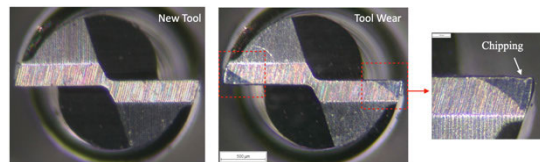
Flank wear of end milling with constant feedrate (1000 mm/min) when the current rises to 0.298 A.
